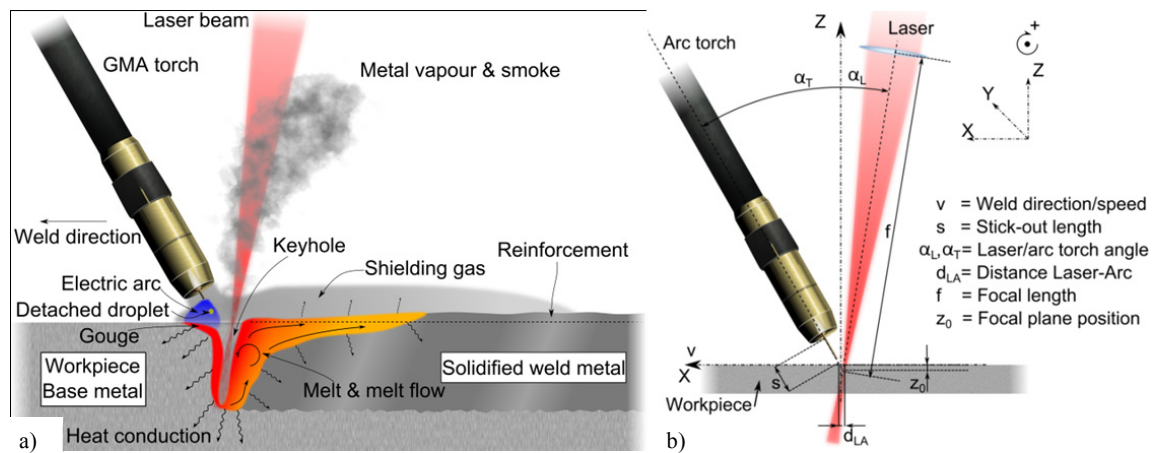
(a) Illustration of laser arc hybrid welding; (b) geometrical setup.
